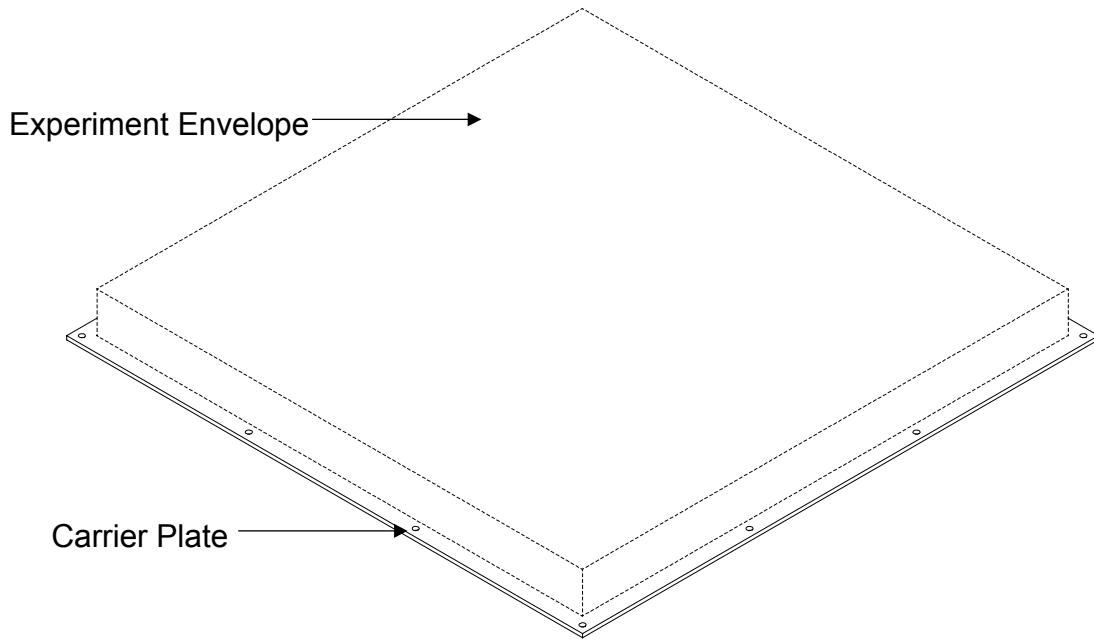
Carrier Plate for Footprint #4 with Experiment Envelope Shown
